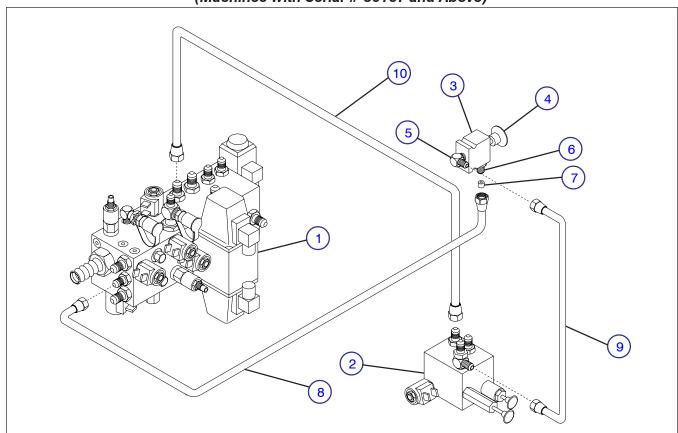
HYDRAULIC/ELECTRIC CABINET ASSEMBLY
